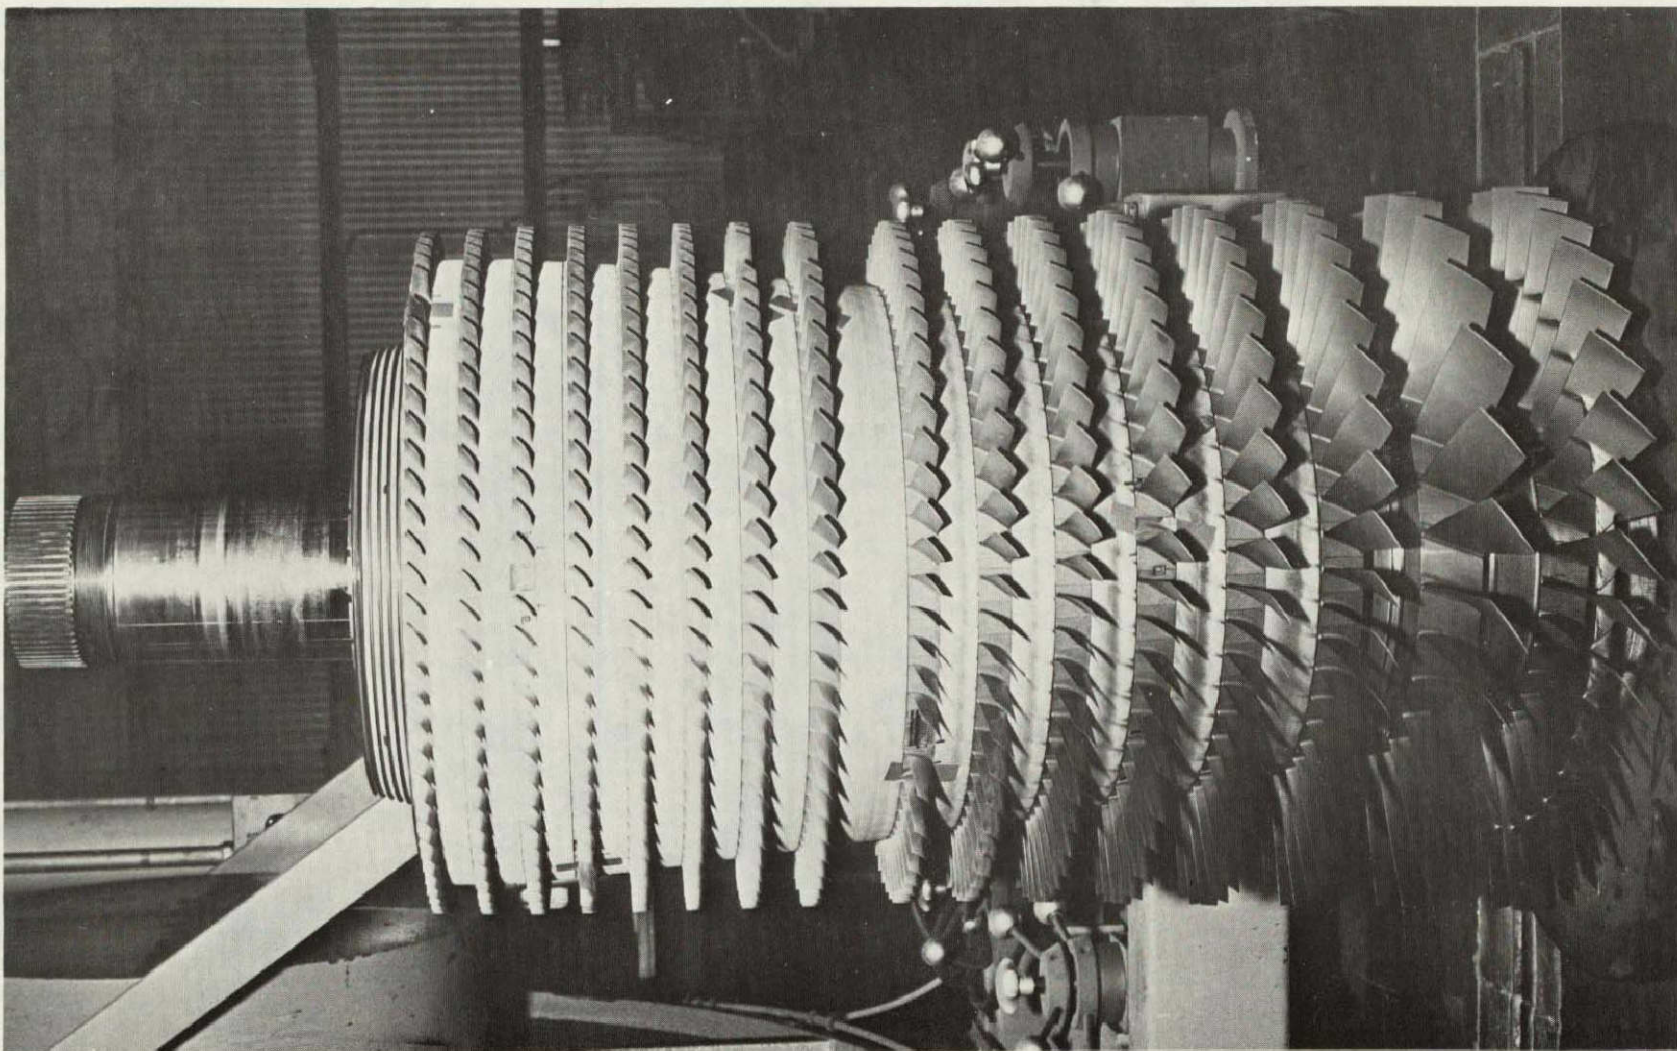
High Pressure Compressor Rotor (Cleaned), Missing Blades
